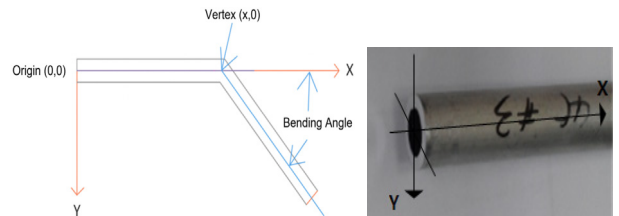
Pipe measurement coordinate reference of a 3D measuring machine
